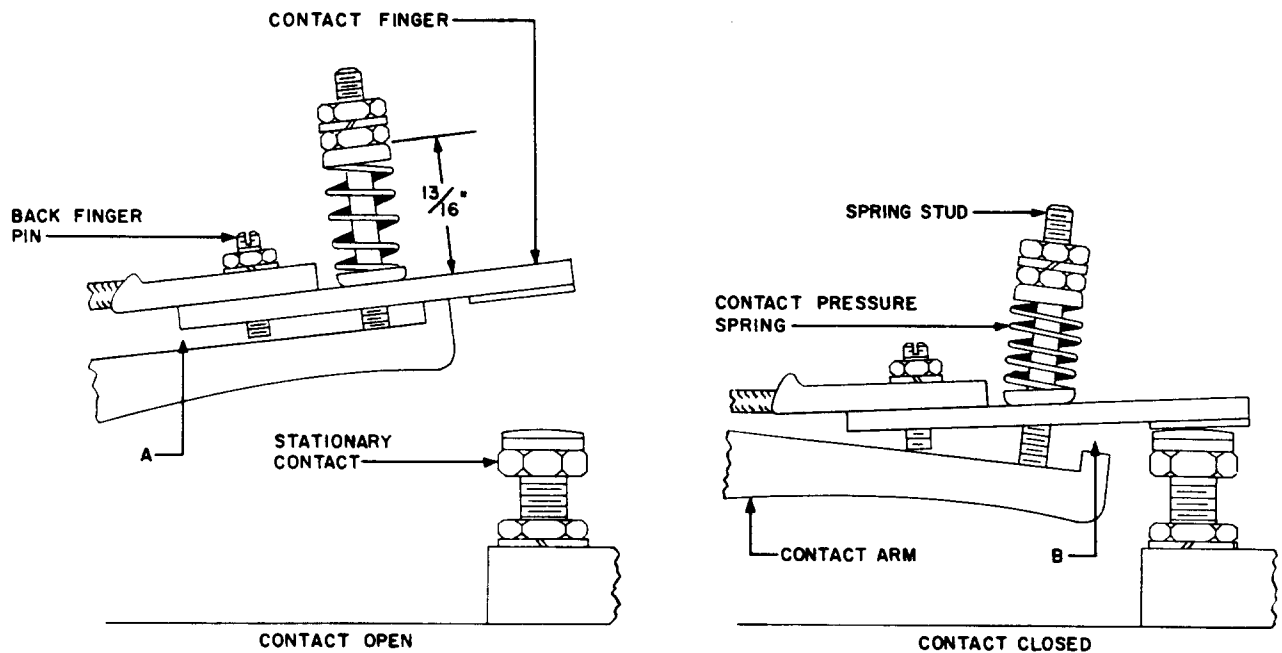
Contact Adjustment for Butt-Type Main Contacts — Bulletin 905, 907, and 908 Switches
